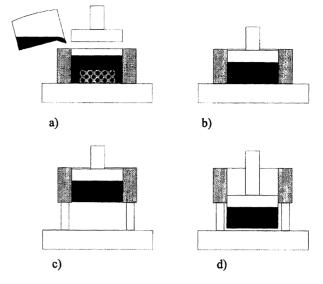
Squeeze Casting process: a) Pouring; b) Infiltration; c) and d) Extraction
